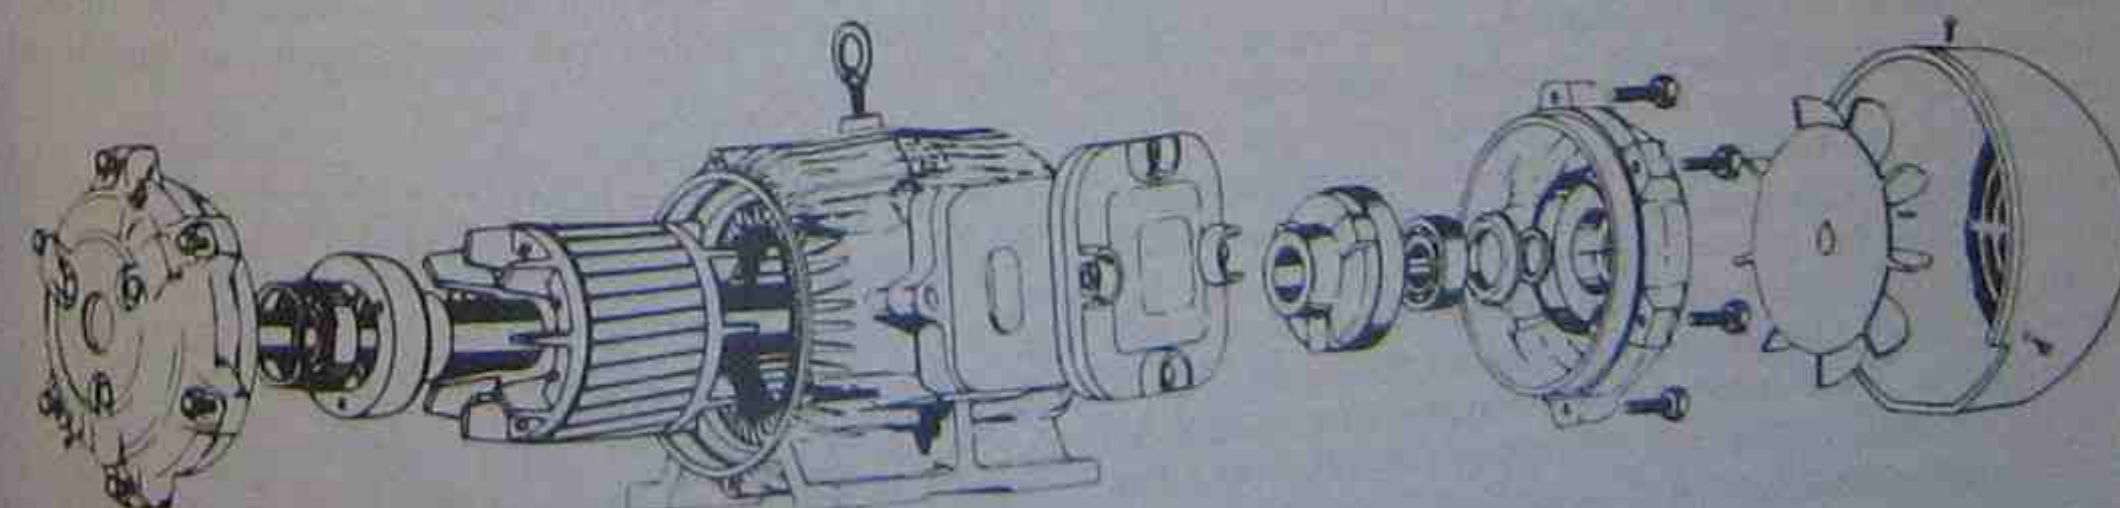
• Component parts of a three-phase induction motor mounted in a flame-proof housing
